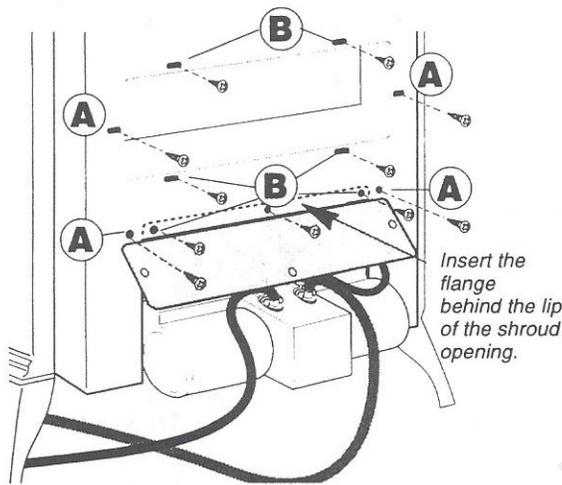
Reattach the cover plate and secure the rear shroud to the firebox draft hood assembly.
